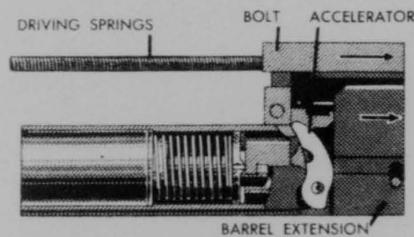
Bolt Striking Accelerator to Release Barrel Extension and Buffer Spring.
